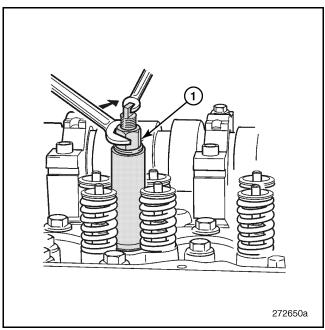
Flaring Copper Sleeve Using Installation Tool
